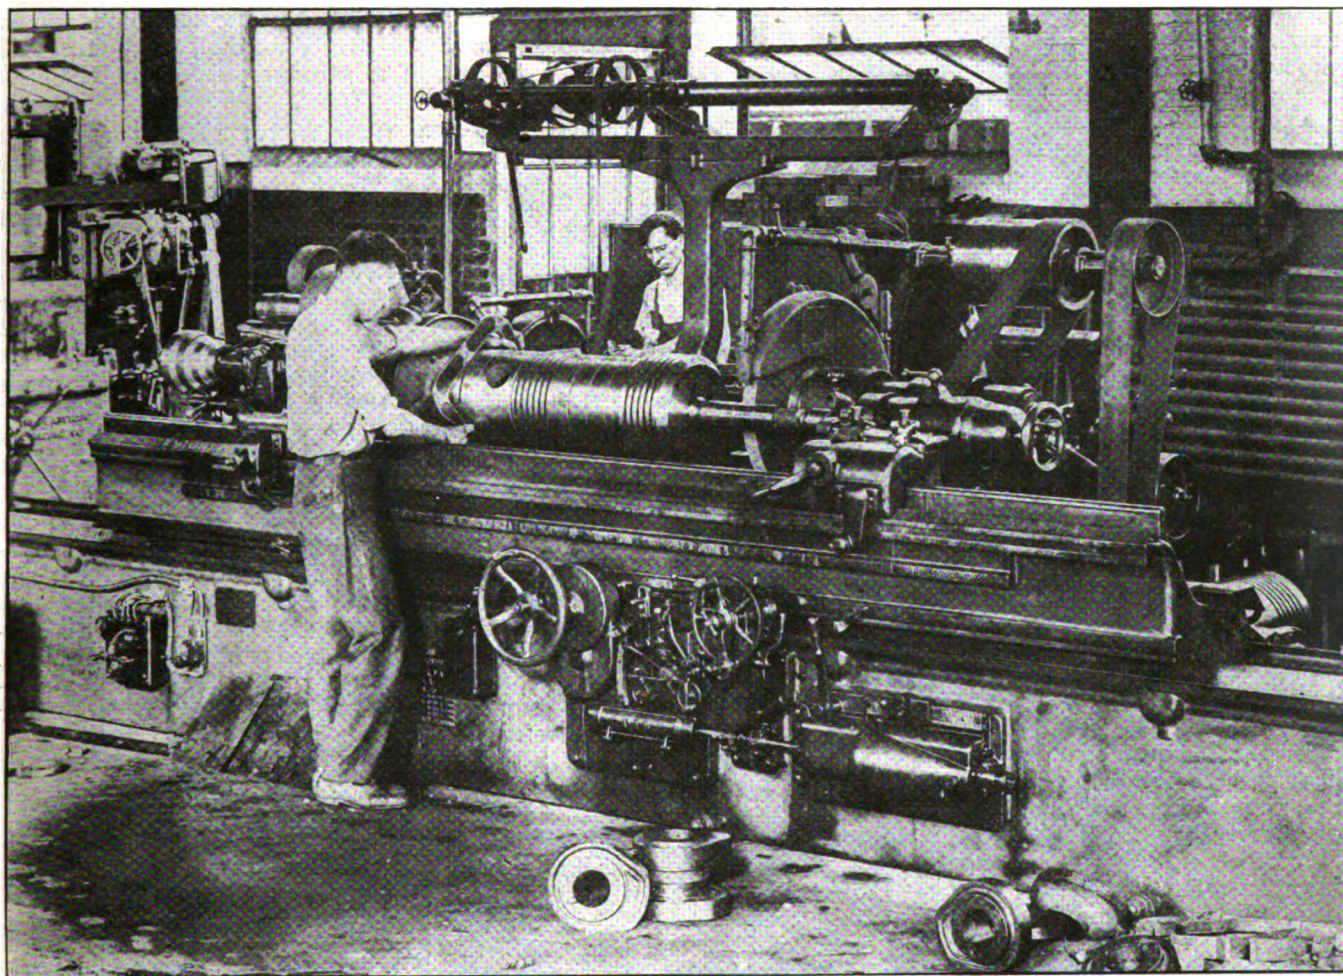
GRINDING A LARGE PISTON TO SIZE ON A CYLINDRICAL GRINDING MACHINE—THE WORK IS ACCURATELY TESTED WITH MICROMETERS
